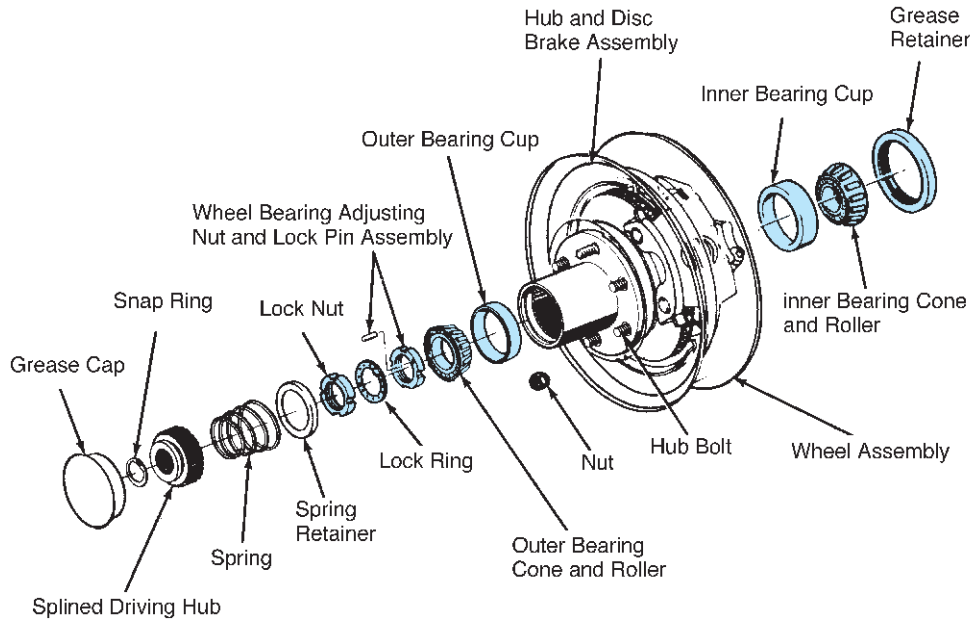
Exploded view of the front wheel bearings from a front drive axle. Note that this unit has a permanently engaged hub. (Courtesy of Ford Motor Company)
